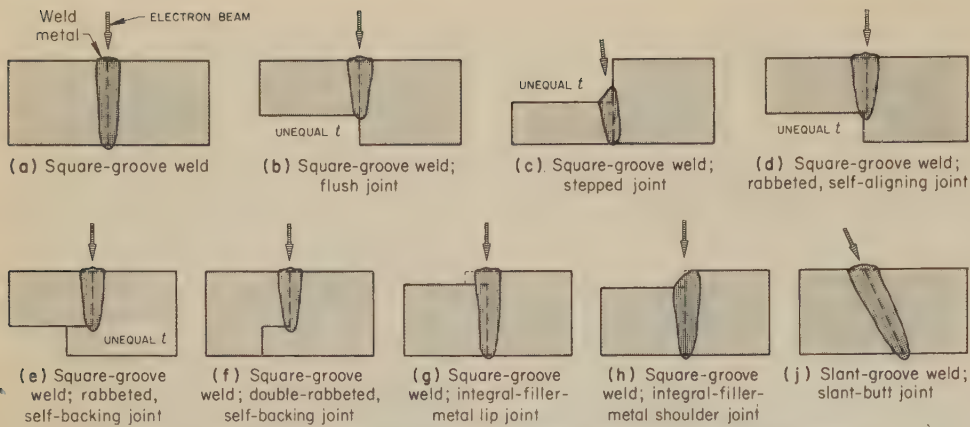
Nine types of butt joints and welds used in electron beam welding
